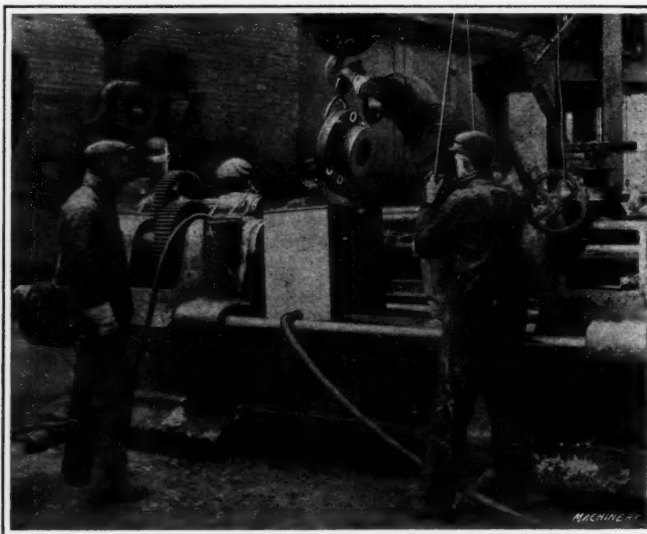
Lowering Faceplate into Place ready to be heated and then shrunk onto Lathe Spindle
